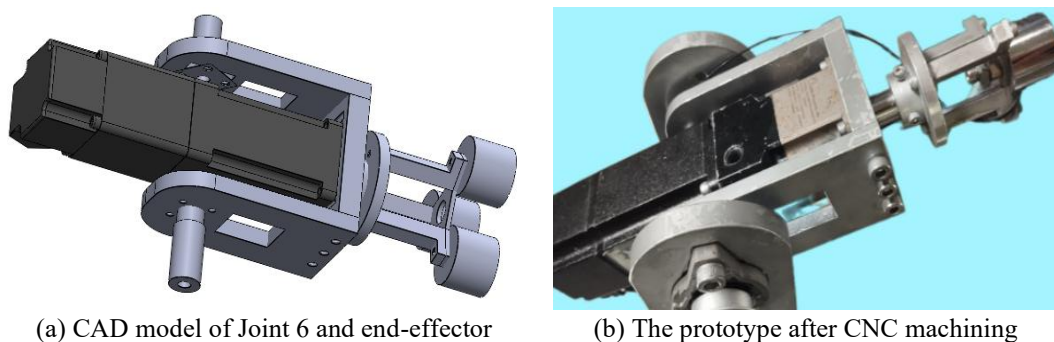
Mechanical design of Joint 6, (a) CAD design of Joint 6 and end-effector, and (b) The prototype after CNC machining
